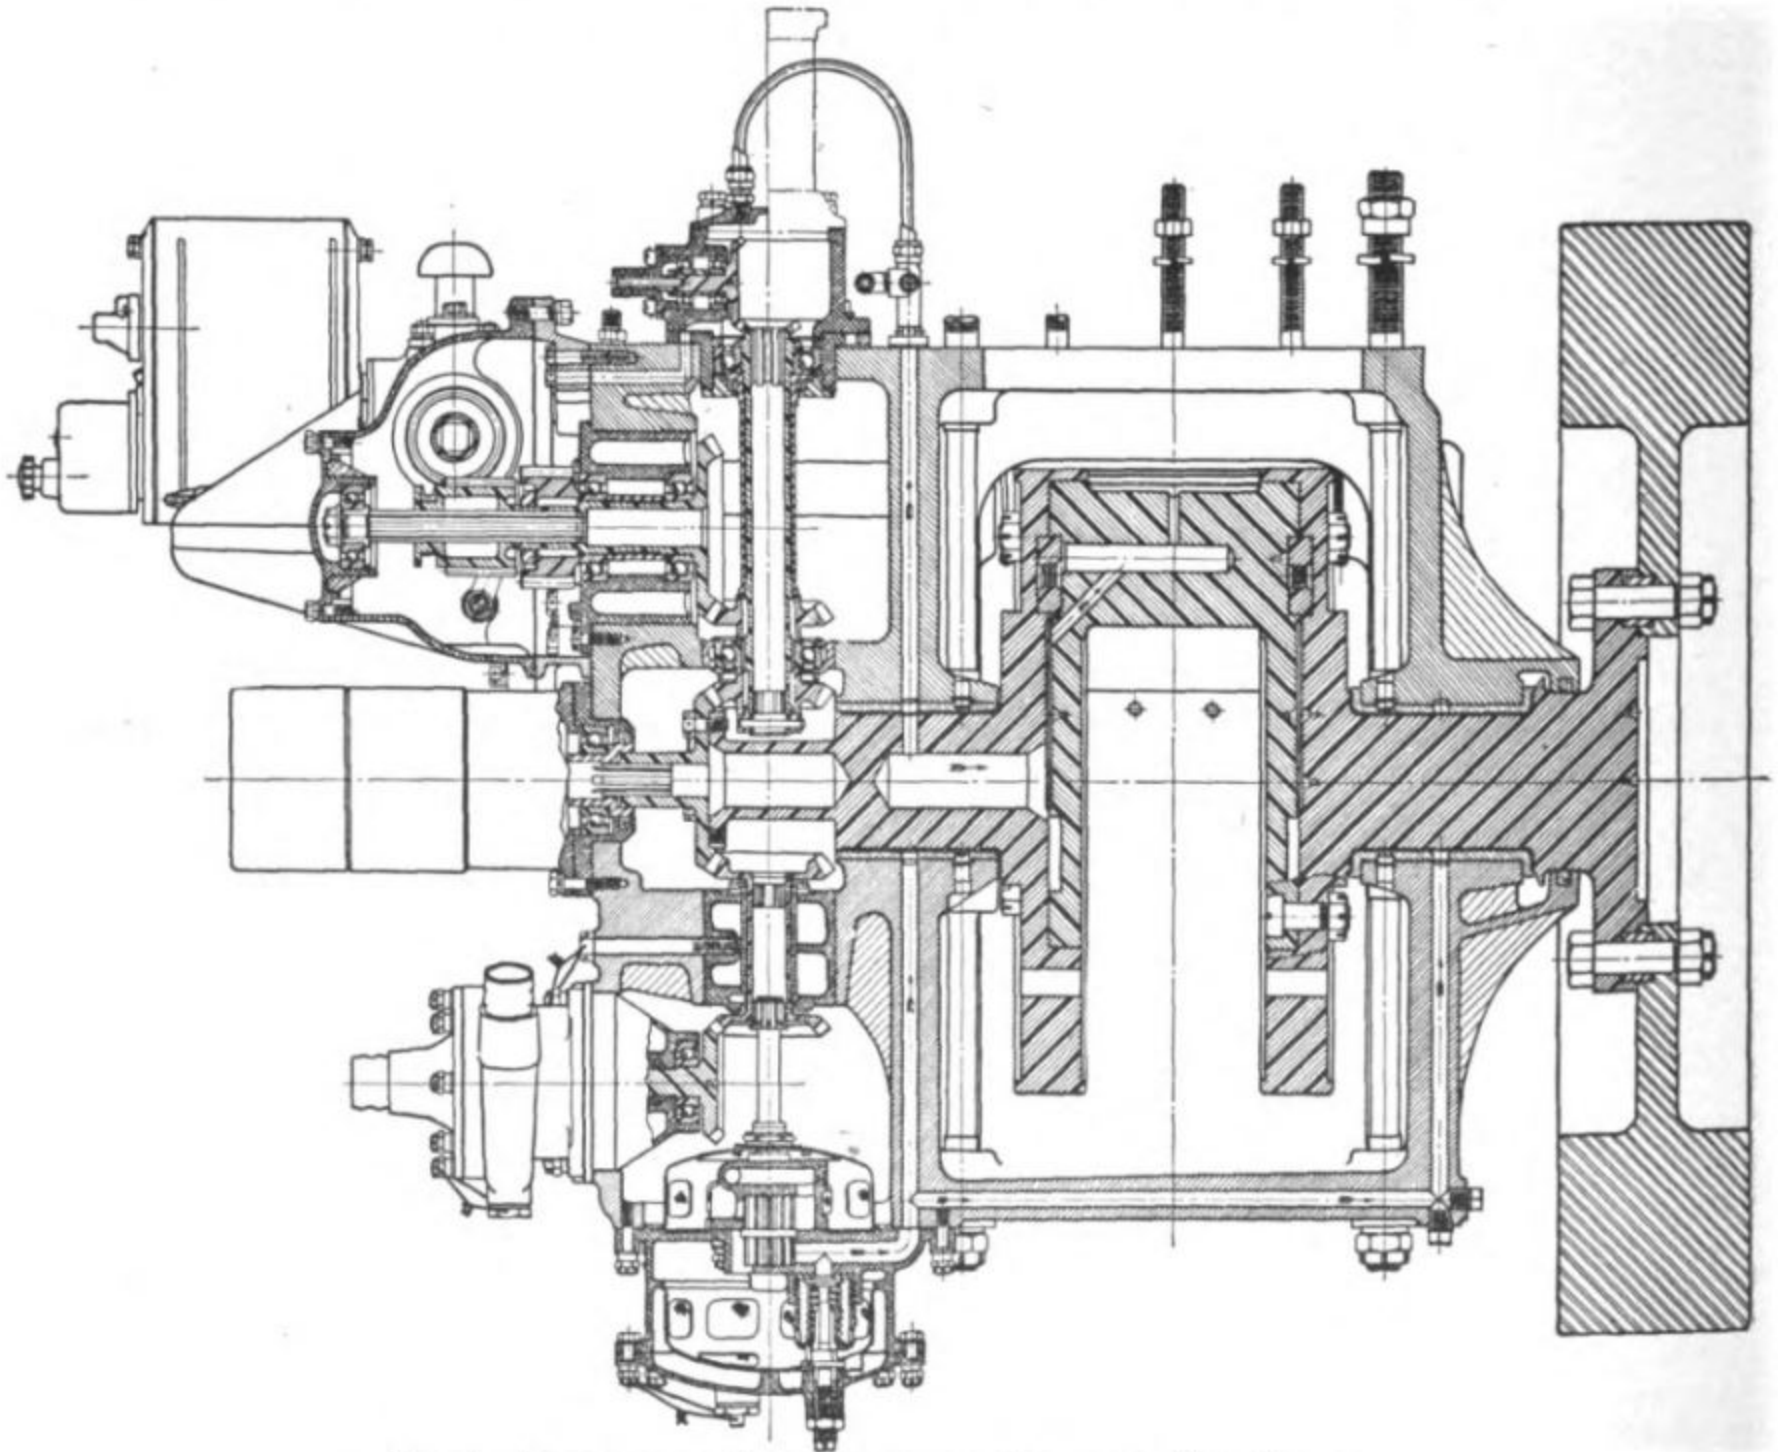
LONGITUDINAL CROSS-SECTION OF UNIVERSAL TEST ENGINE
